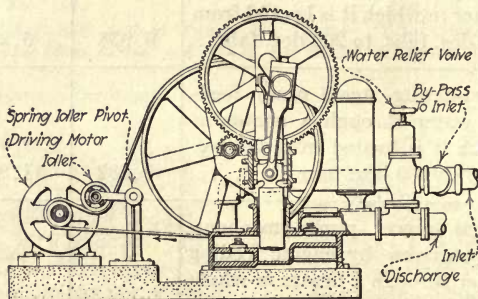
Section Of Motor-Driven Triplex Single-Acting Boiler Feed Pump.
